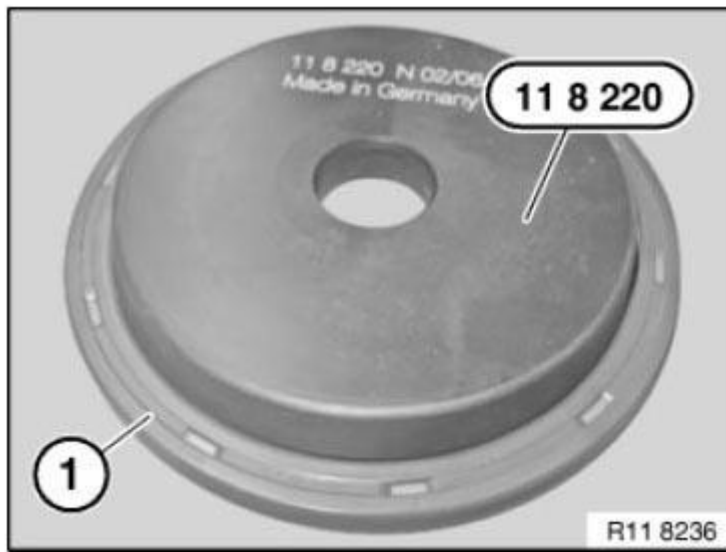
Identifying Radial Shaft Seal On Special Tool 11 8 220
